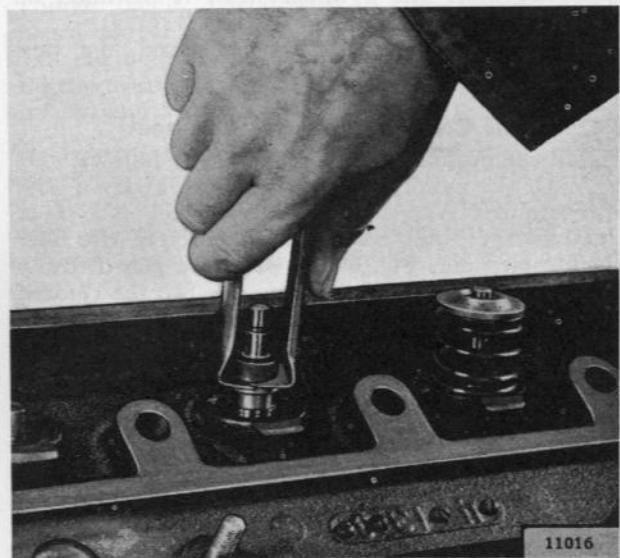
SEATING SEAL ON VALVE GUIDE WITH INSTALLER TOOL W-273
